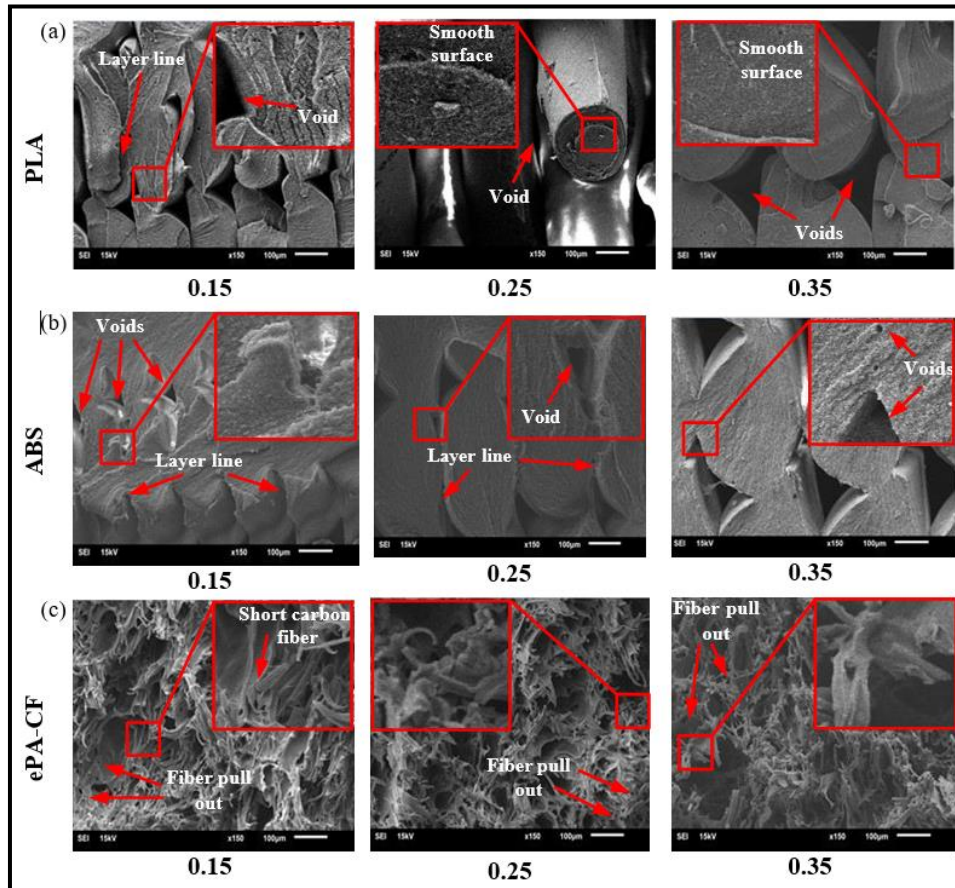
Fracture surfaces of the examined workpieces, (a) PLA, (b) ABS, (c) ePA-CF
